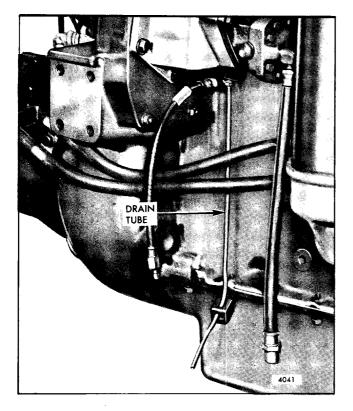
Air Box Drain Tube Mounting (In-Line Engines)
